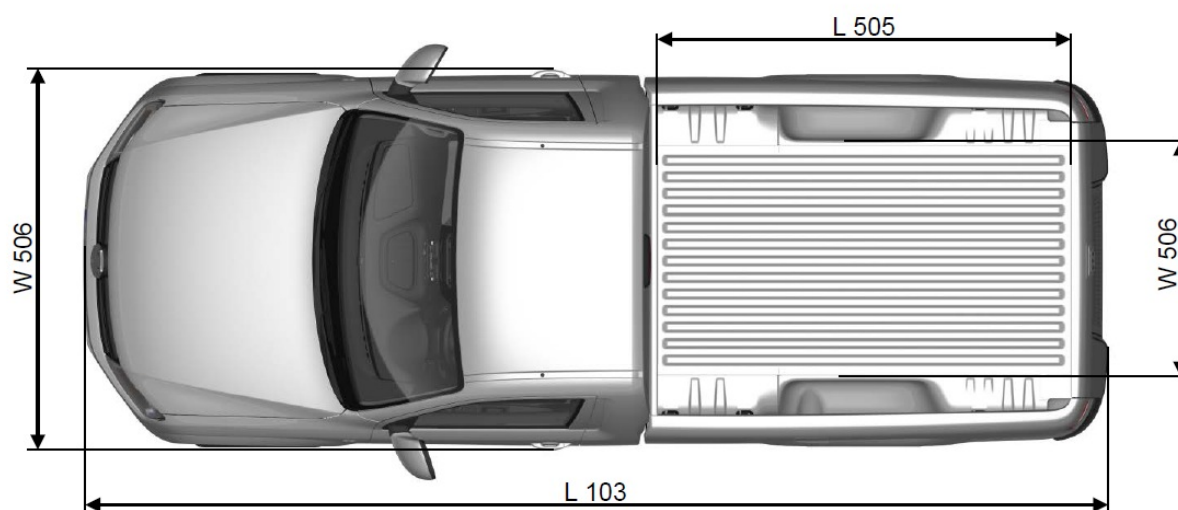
Plan view of AMAROK SC (Single Cab)
